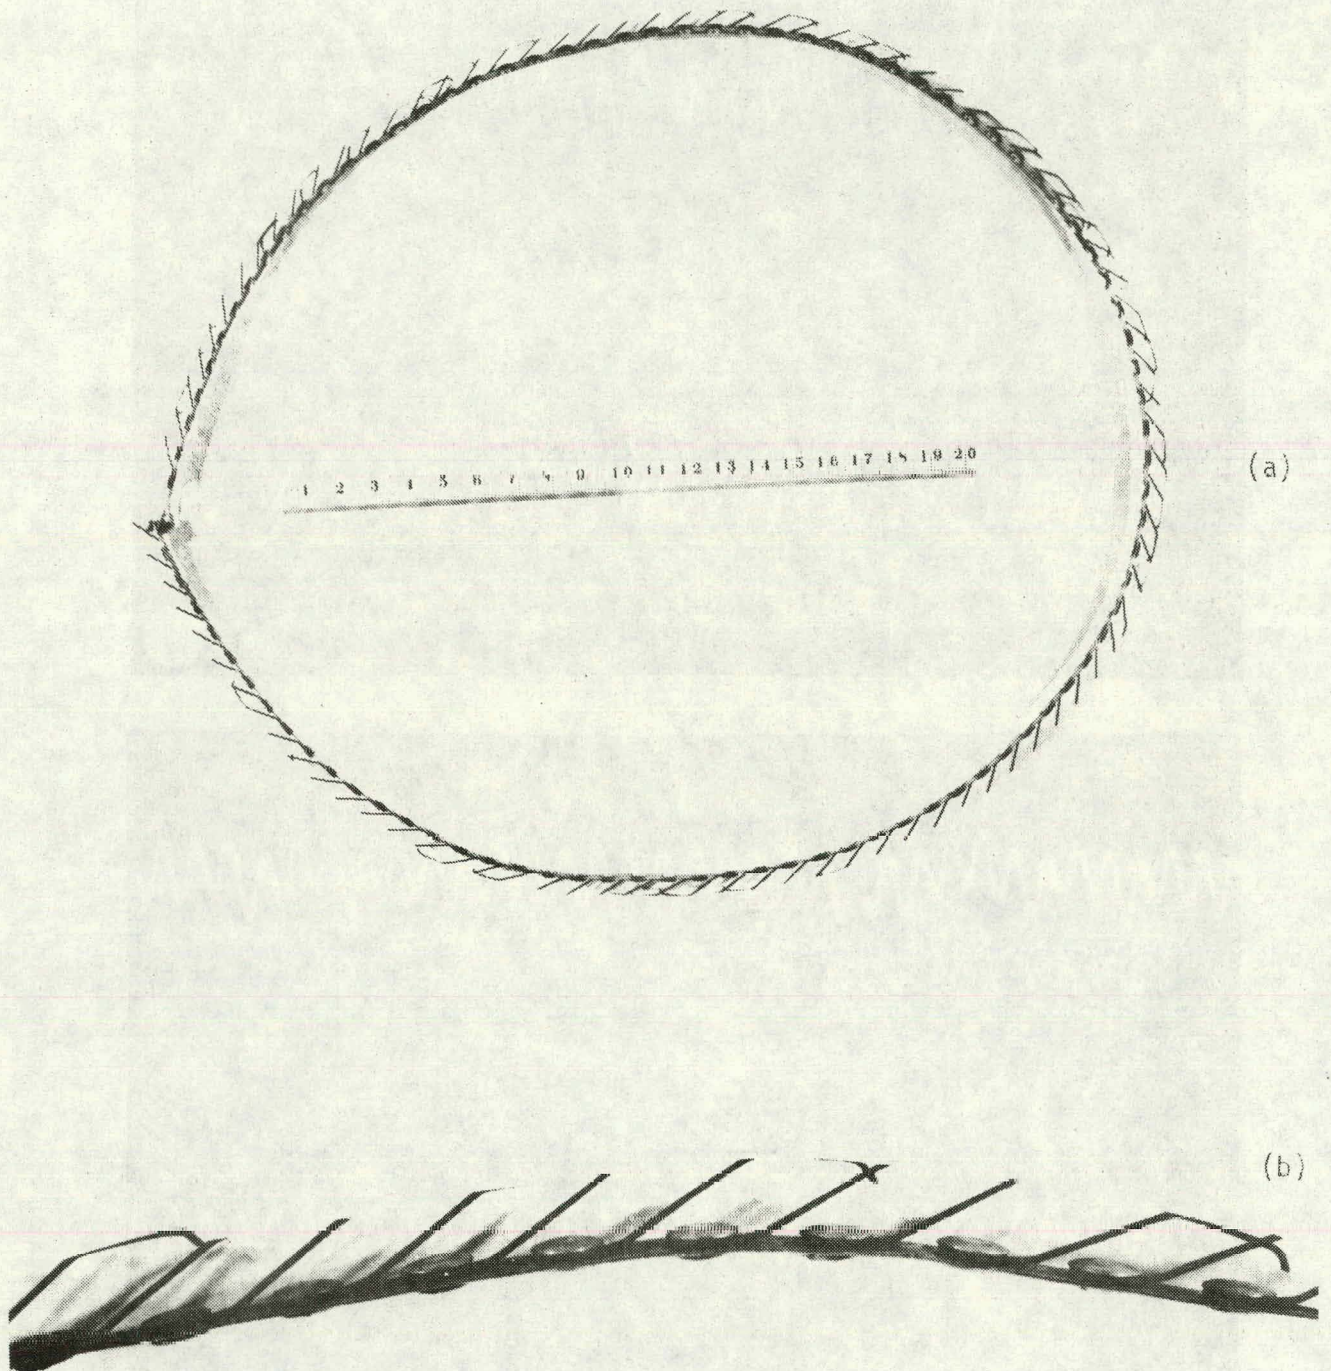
Photographs of the worn spring assembly after removal from the base pulley. In (a) the entire strip is shown, and (b) shows details of a small section of the strip.
